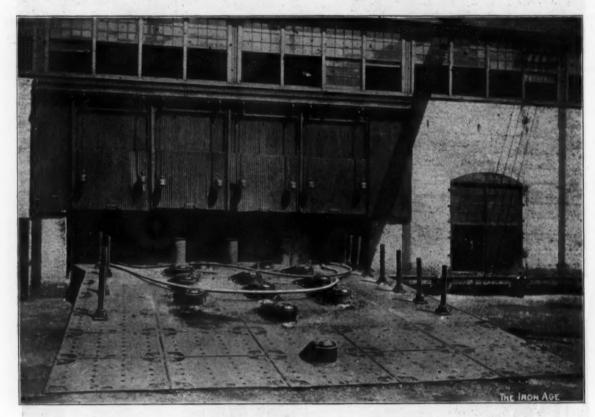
The Blooming Mill of the Grand Crossing Tack Company.—Loops of Billet, with Runway of Finished Billet to the Right.
